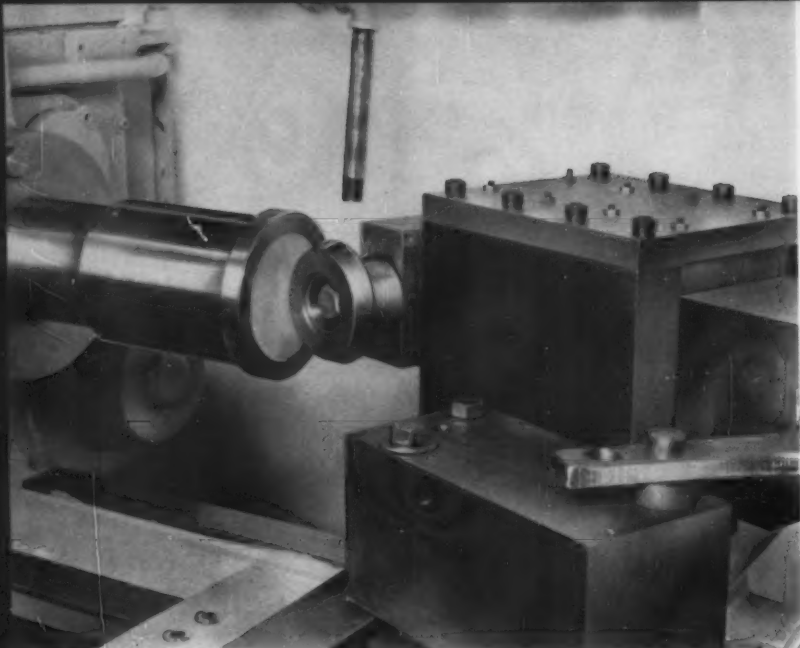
Modified turret lathe set up for roll-forming thin-wall conical parts. Forming roll is mounted on the end of a square ram.
